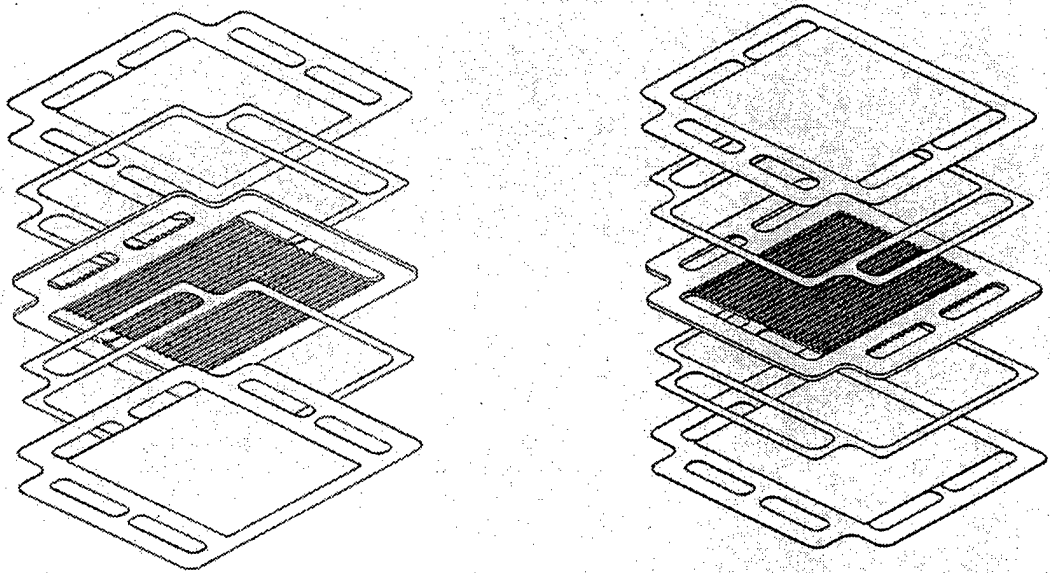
Module assembly: (A) air side, (B) oxygen side.
